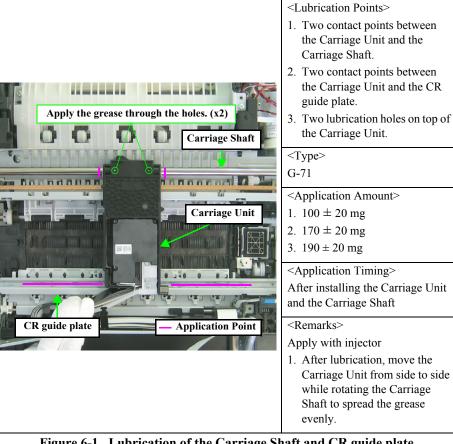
Lubrication of the Carriage Shaft and CR guide plate
